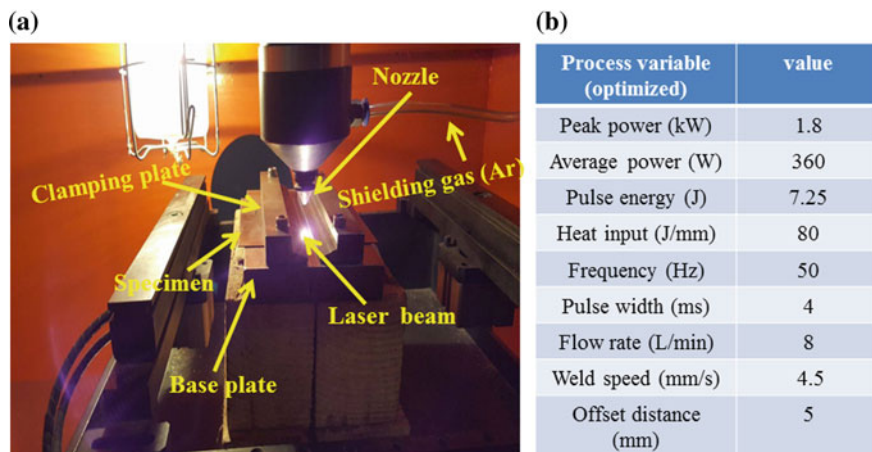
a Schematic diagram of pulsed Nd: YAG laser welding set-up; b optimized parameter for dissimilar weld
